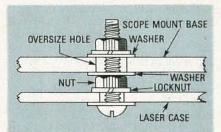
DETAIL FOR THE RECEIVER mounting plate. An oversize hole mounting base allows coarse adjustment of the scope assembly. Use an oversize washer on both sides of the hole, and a lockwasher at the laser's case.
